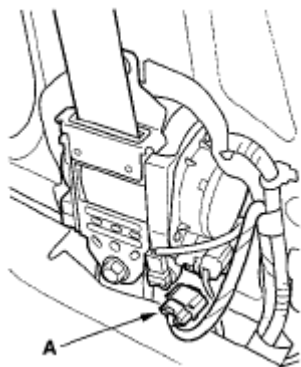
Identifying Seat Belt Tensioner Floor Wire Harness 4P Connector
